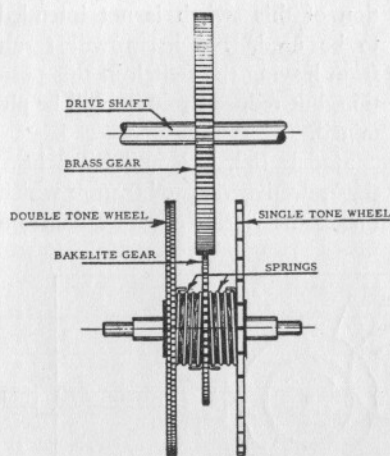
Chorus Generator Tone Wheel Assembly
